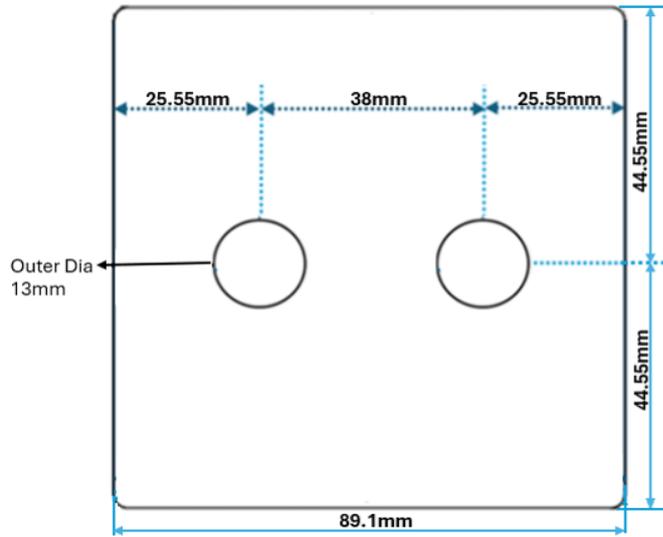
CTP40 Device (2-Button) Dimension – Front View
